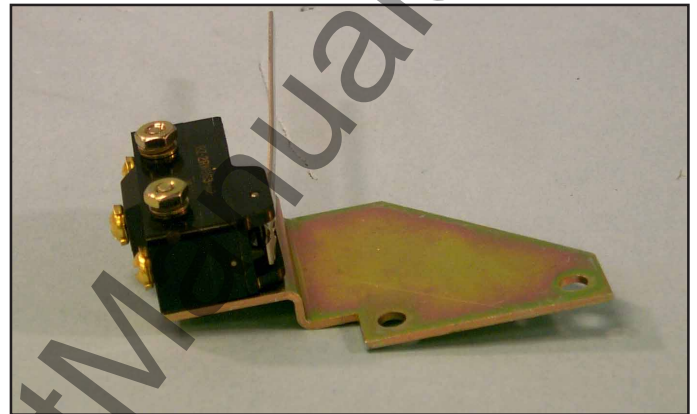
Microswitch Installed on the Auxiliary Switch Mounting Bracket.
